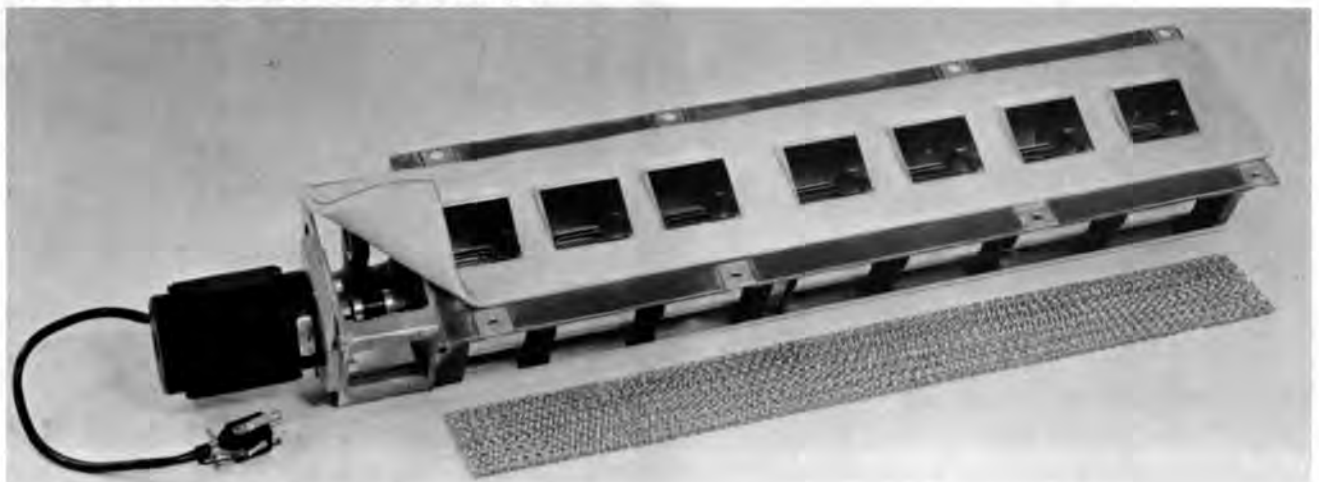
Blower Assembly, 7-Scroll, 1/30 HP
